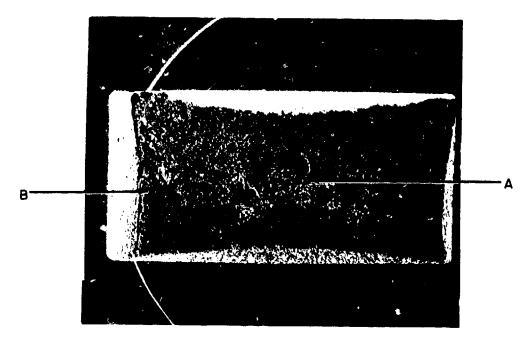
Tensile fracture surface of A-36 steel, 12x.
